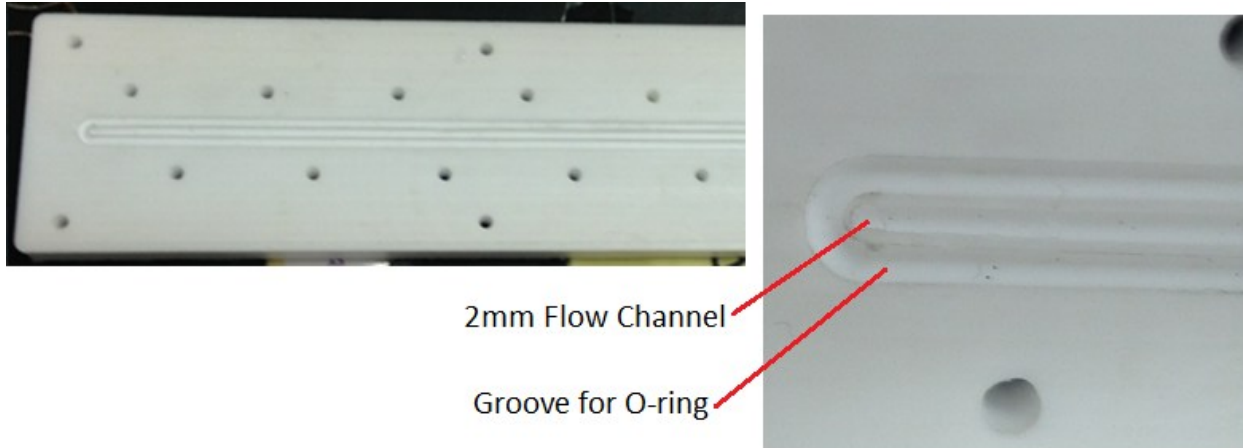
Part 2 (bottom) of solenoid valve manifold, 2mm flow channel and O-ring groove.
